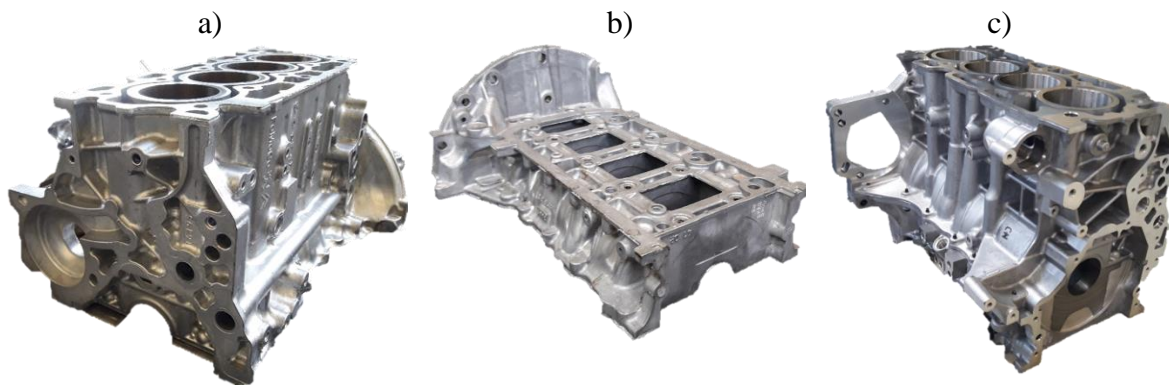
Workpieces a) Unmachined upper cylinder block workpiece a) Unmachined camshaft bearing cap c) Machined cylinder block
